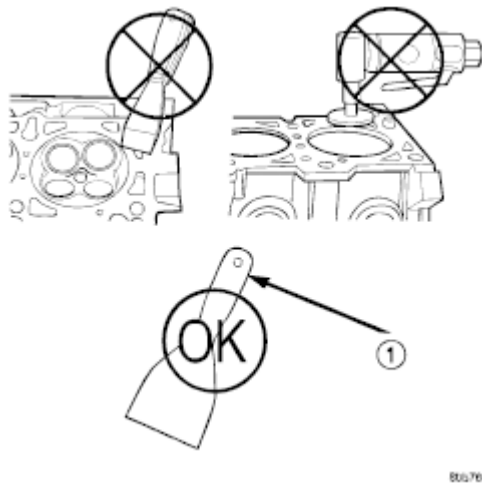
Precaution For Cleaning Cylinder Head And Cylinder Block Surfaces
